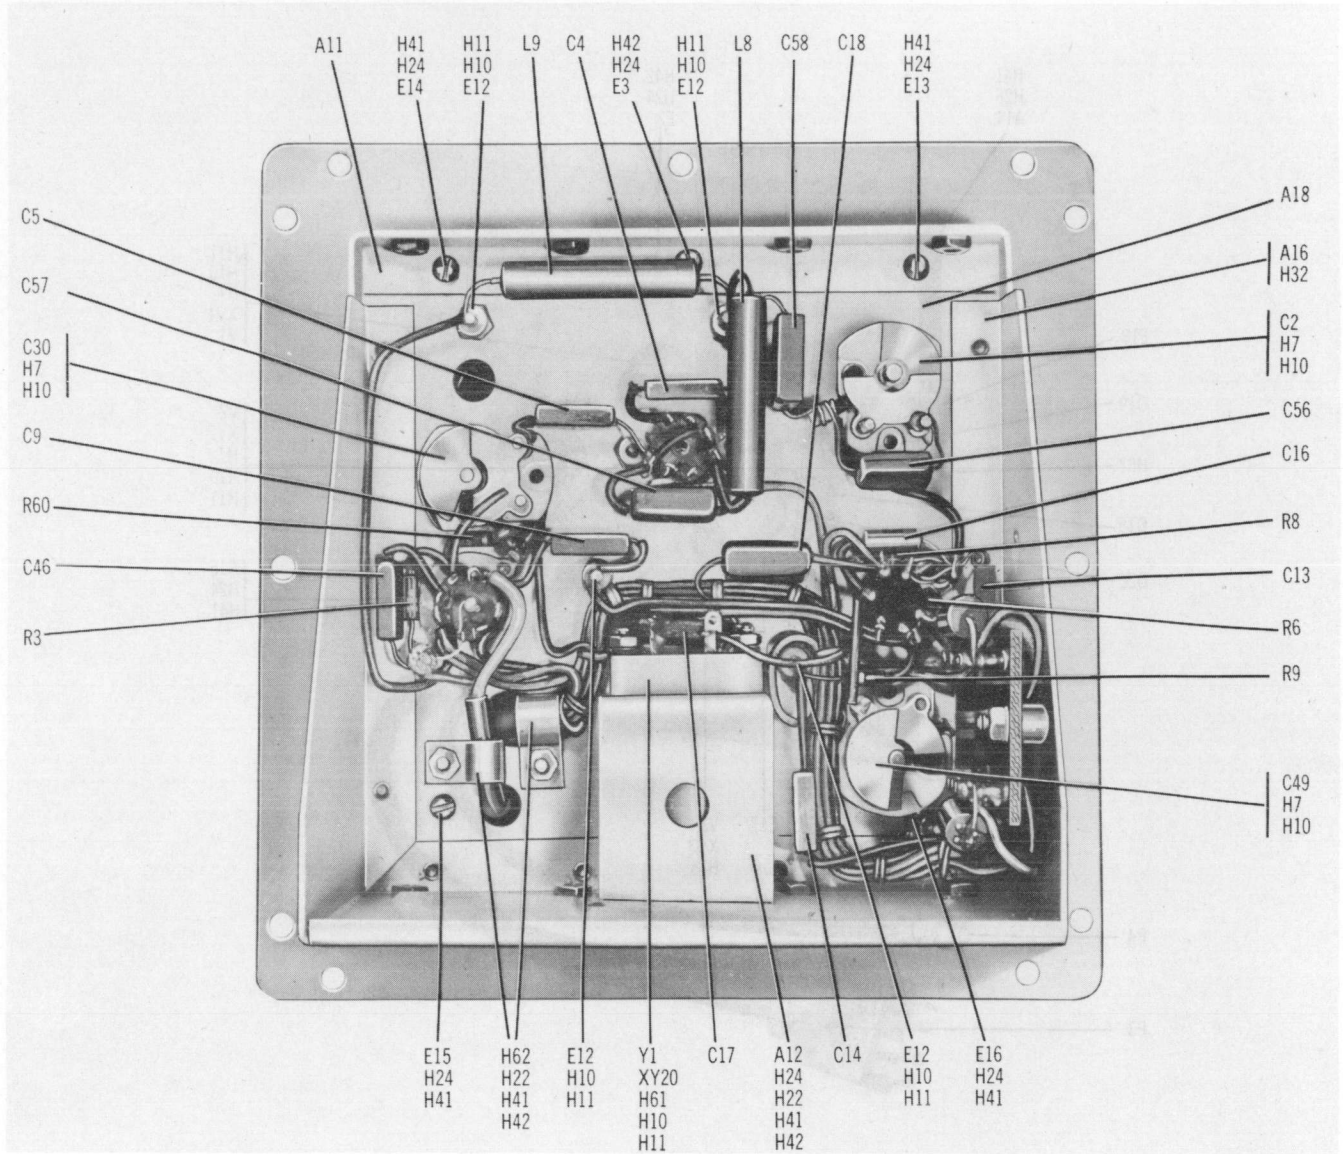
Inner Oven (E19), Front View with C1 and E41 Removed
